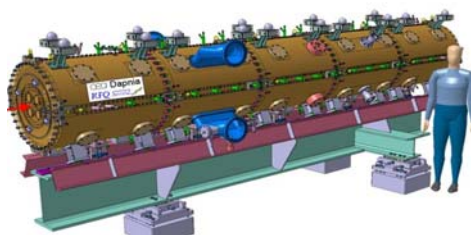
Mechanical design of the RFQ 3-D view CEA/DSM/DAPNIA (Saclay)
